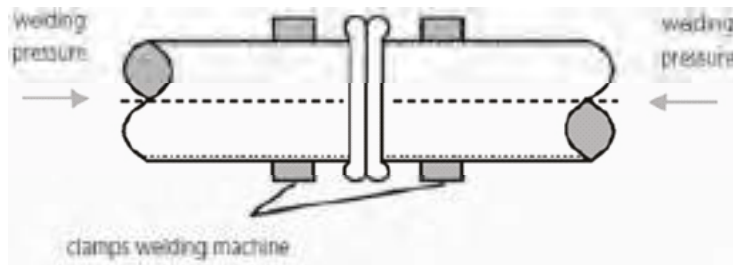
PE pipe butt fusion melting and bead formation
